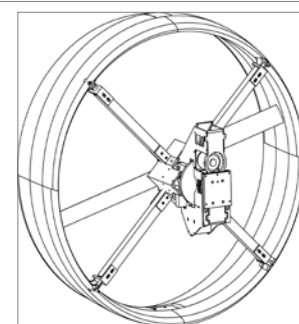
Ring Wing with Heli Fuselage and Rotor Blades
